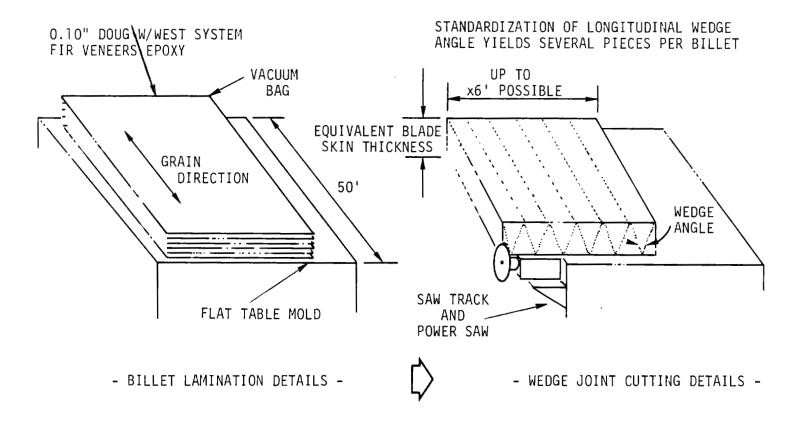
Center Blade Wedge Joint Configuration and Typical Construction
